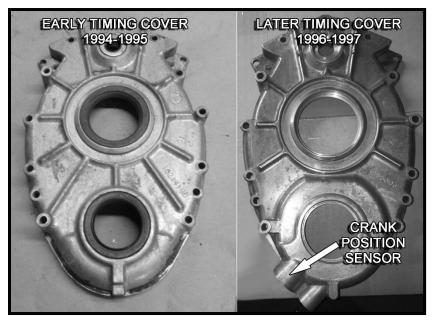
CKP Sensor -The crank position sensor will only be found on 1996-1997 engines. Those using a 1996-1997 ECM must connect to a crank position sensor or have codes 335 & 336 turned off in the ECM. The crank position sensor simply detects engine misfires and has zero control over engine fueling or timing.
